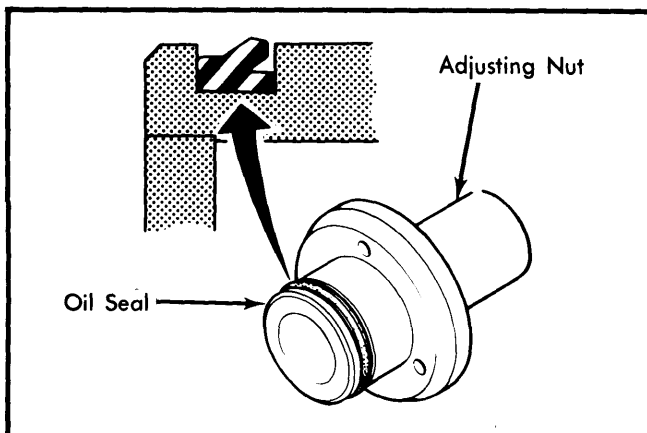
Installation of Oil Seal on Rear Caliper Adjusting Nut
